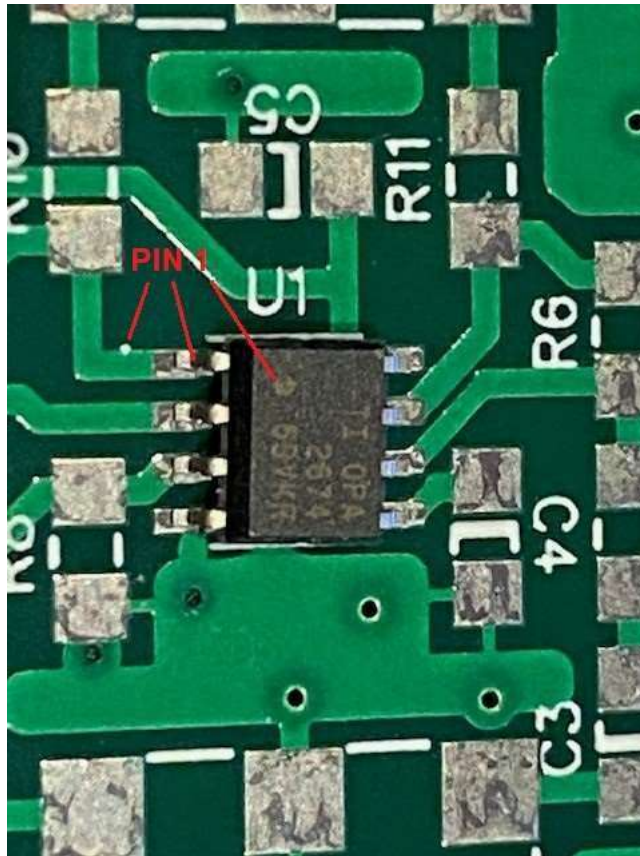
Location of PIN-1 For OPA2674 Part Placement On The PCB
